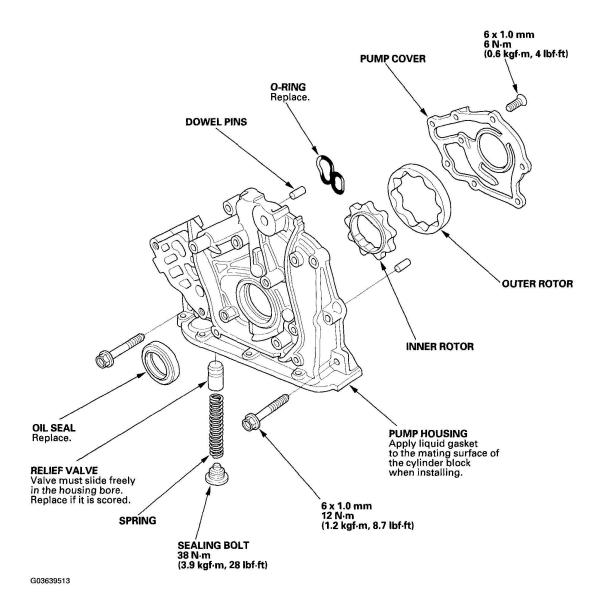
Exploded View Of Oil Pump Courtesy of AMERICAN HONDA MOTOR CO., INC.
